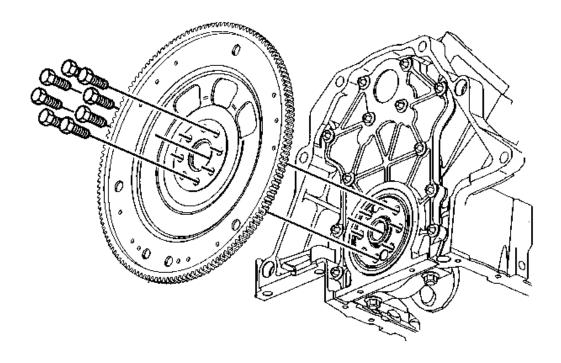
View Of Engine Flywheel & Bolts Courtesy of GENERAL MOTORS CORP.
